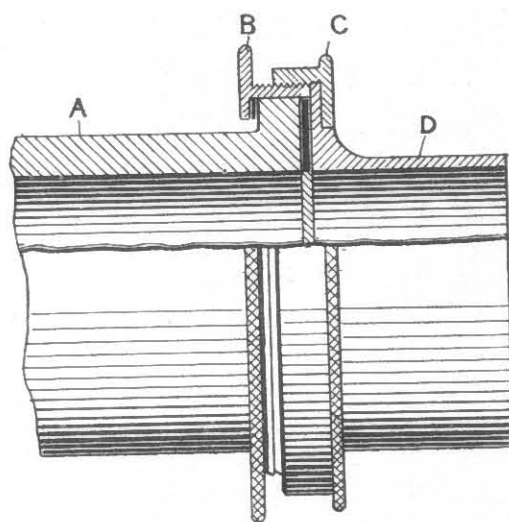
Quirk, Sharp, & Co.'s Joint.
